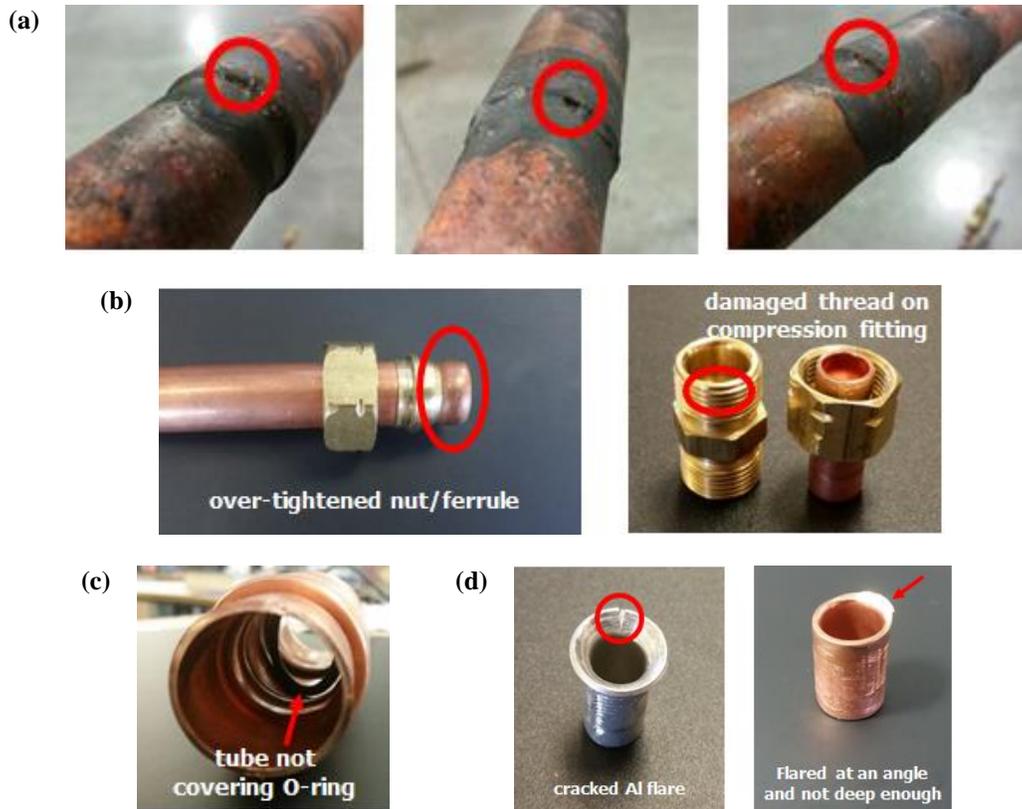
Images of fitting assembly failures: (a) brazed joint, (b) compression fitting, (c) press fitting, and (d) flare fitting.
